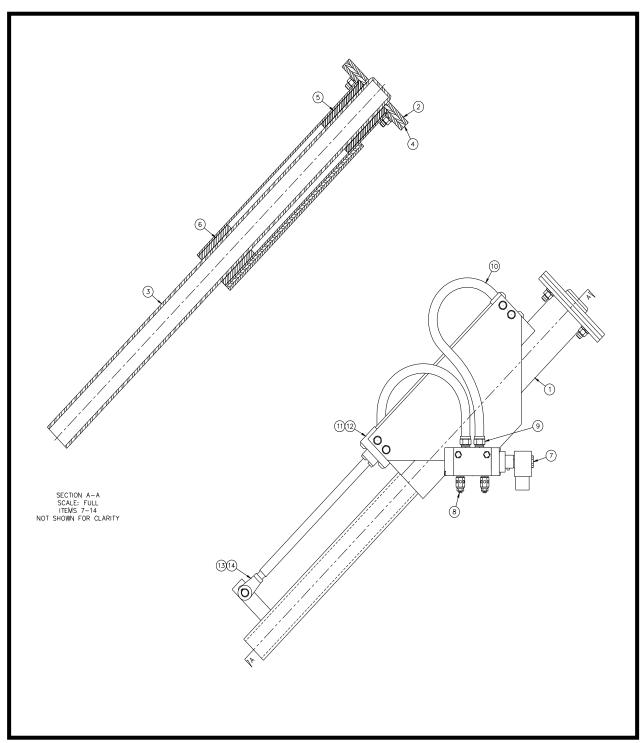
, GP SAMPLER PARTS DRAWING
